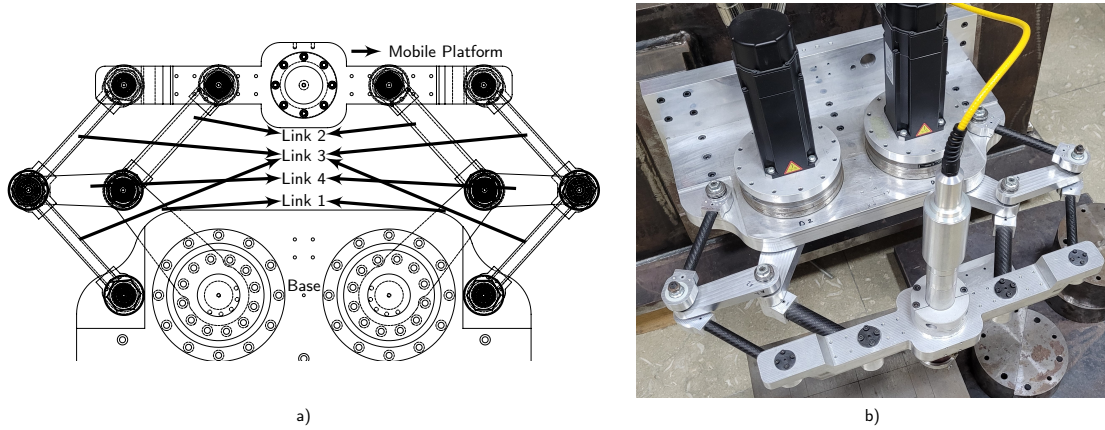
a) CAD sketch and link types of the manipulator, b) the manipulator.
